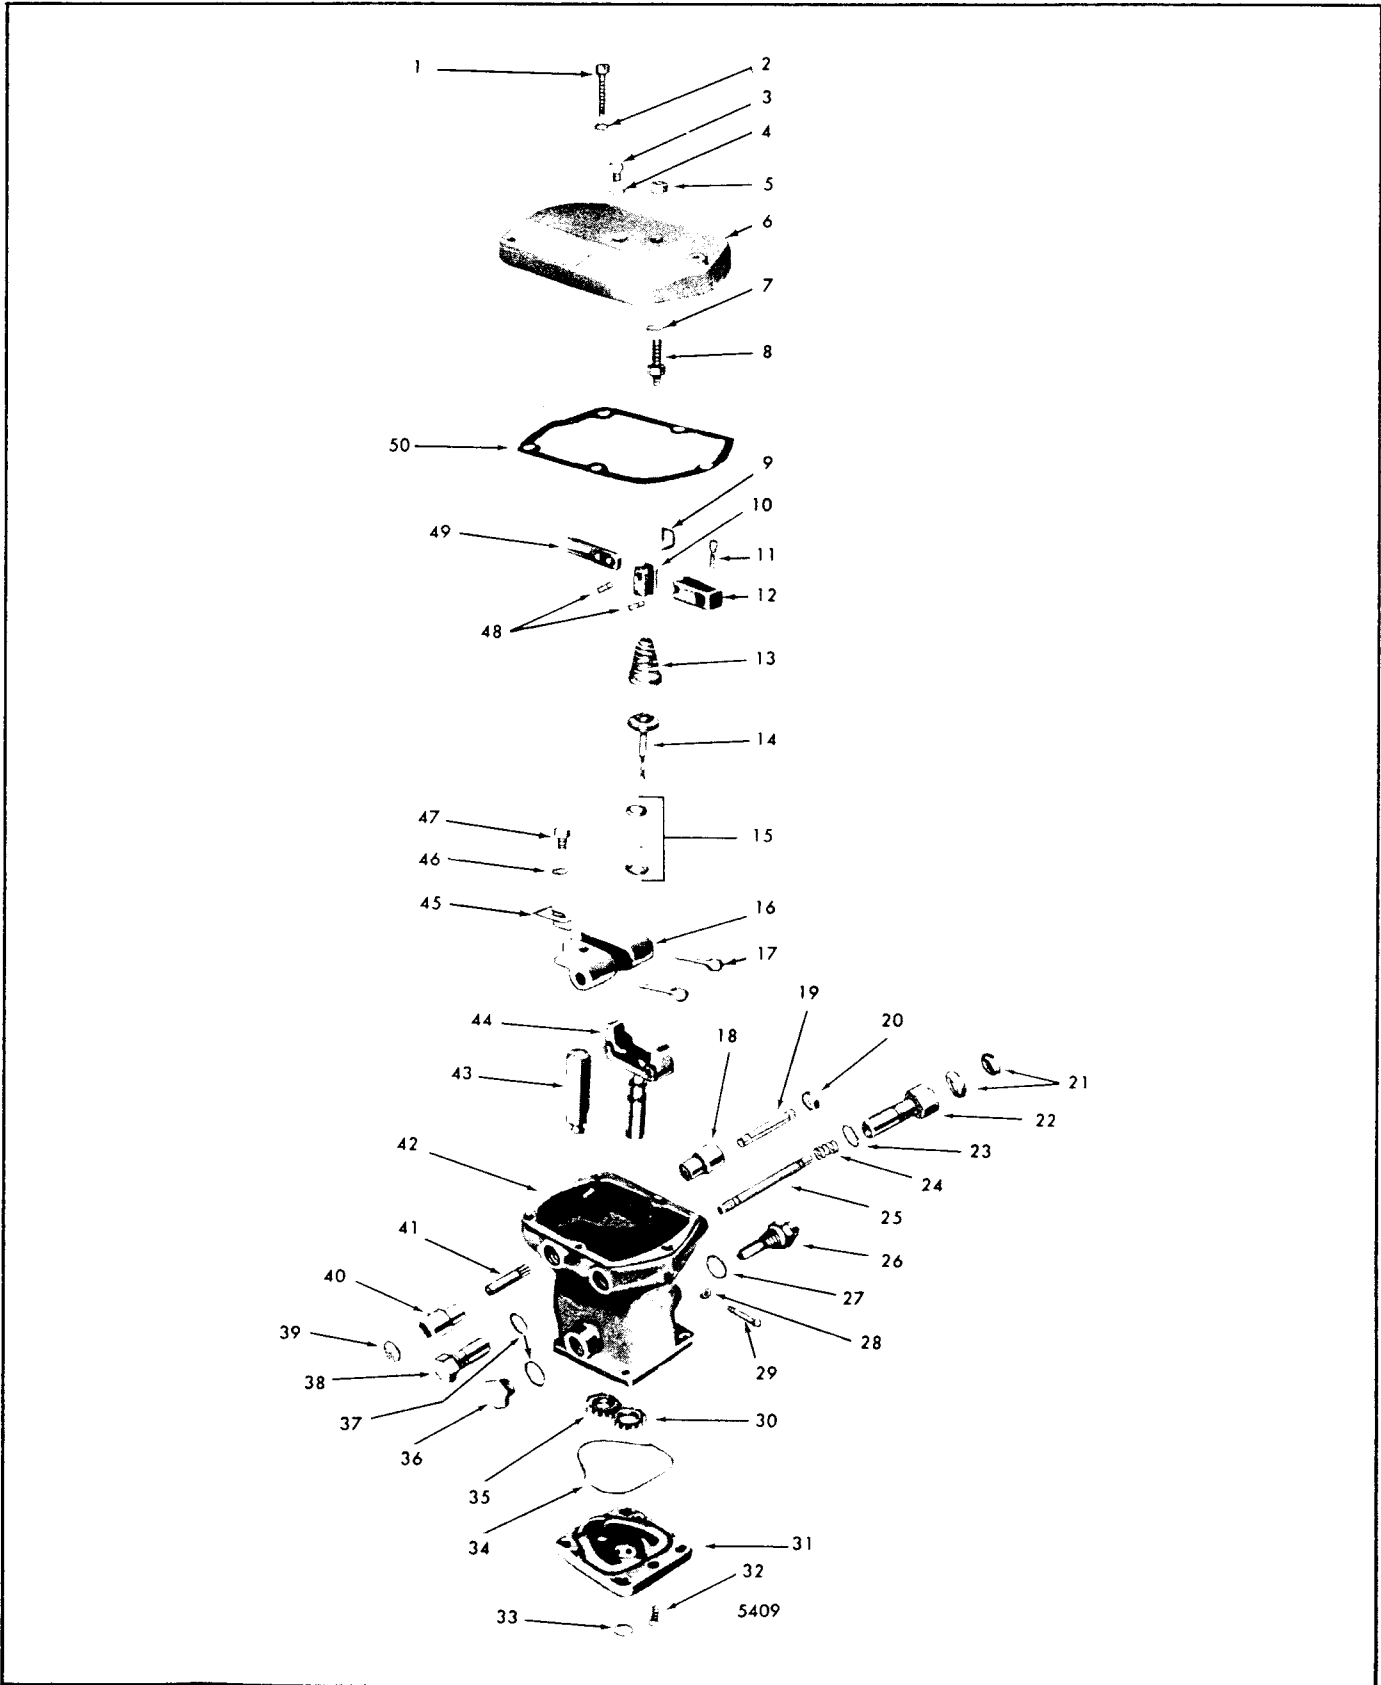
Hydraulic Governor Details and Relative Location of Parts (Former)
